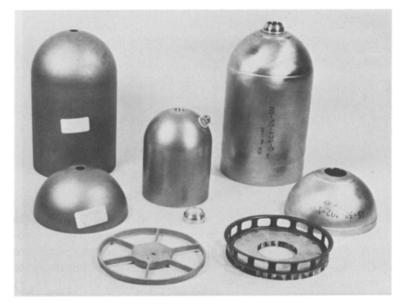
Photograph showing the two PV designs evaluated Left, an electron beam welded design, right, a tungsten-inert-gas welded design, centre, internal  $45^{\circ}$  offset terminal arrangement (3 5 in cell)
